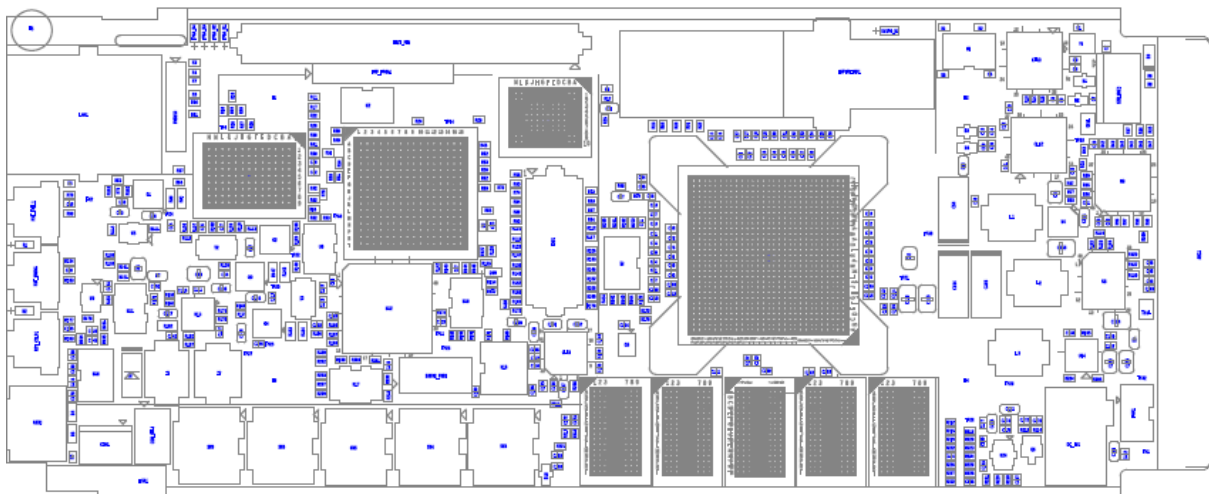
TMDXEVM6670L EVM Board Assembly Layout – TOP view
